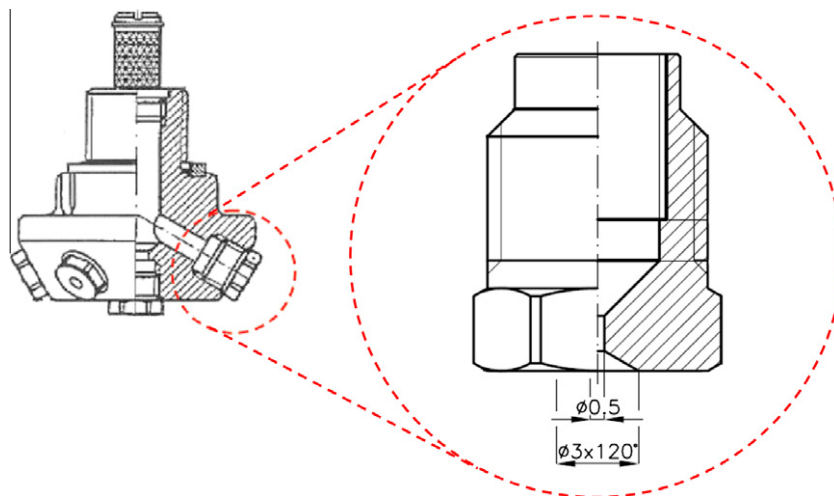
Technical sketch of the nozzle and detail of the employed injector (dimensions are reported in mm).
